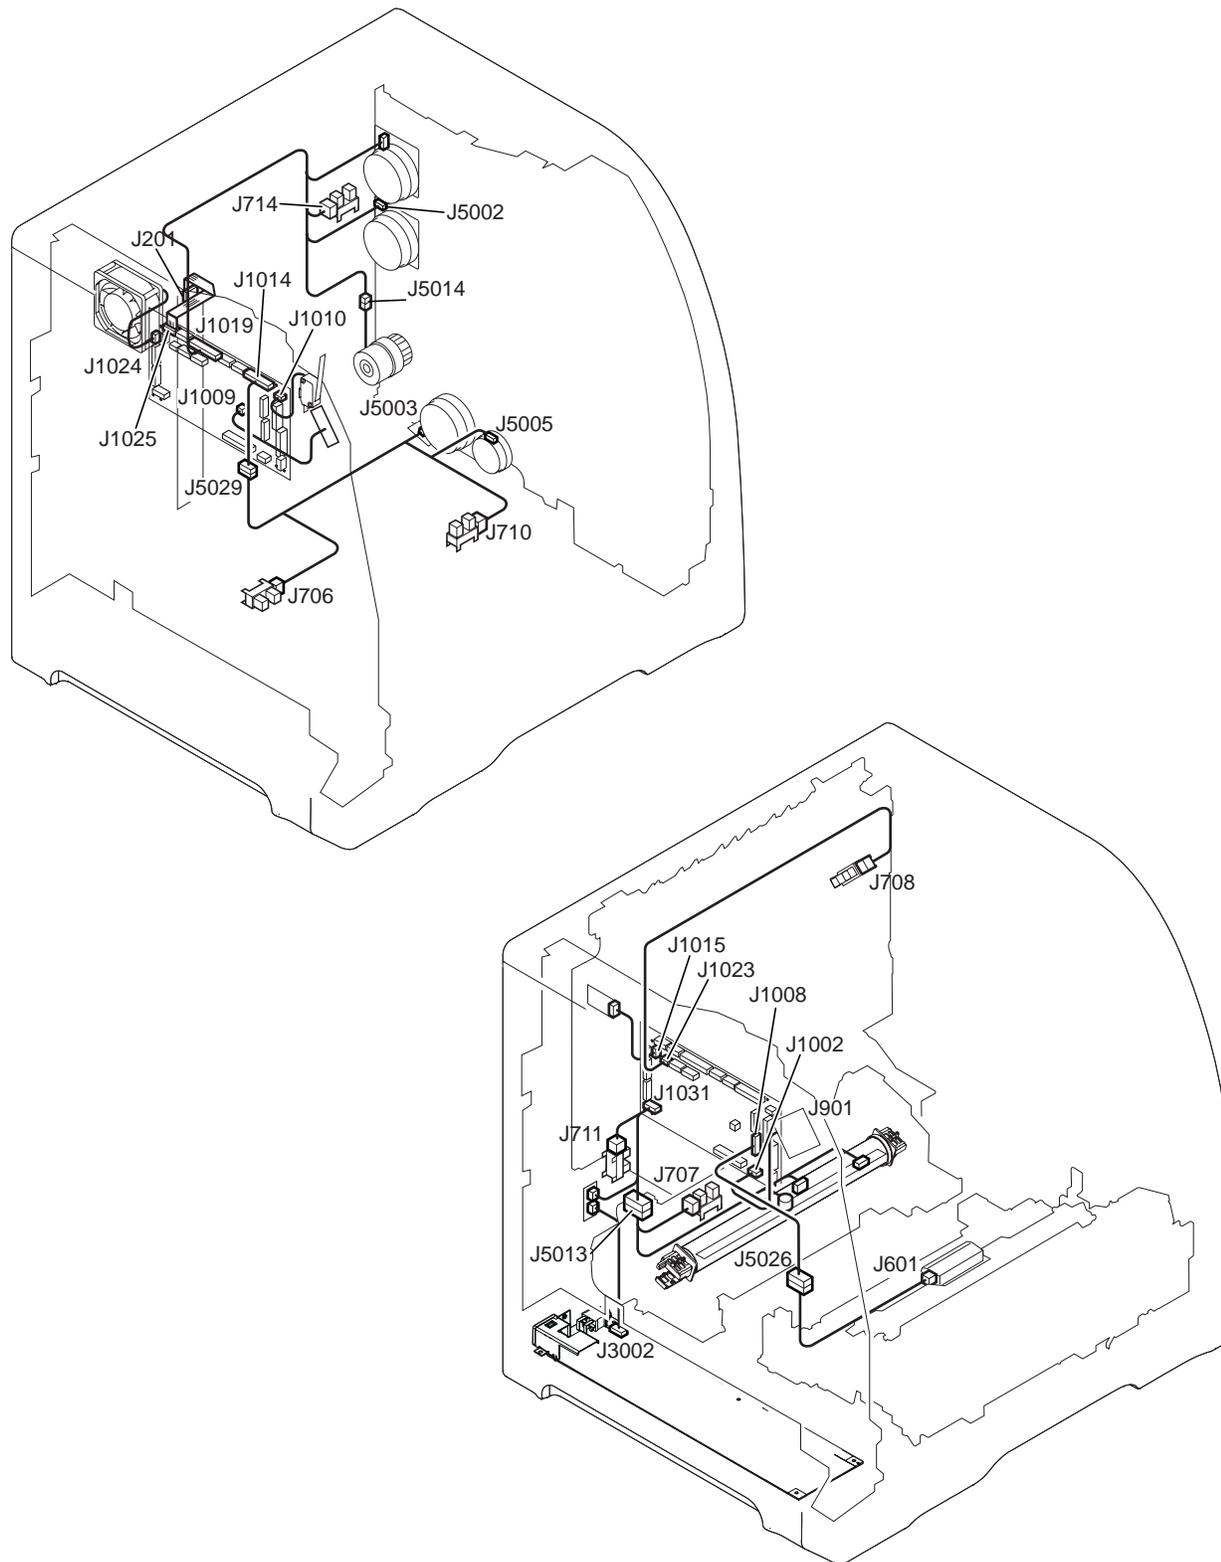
Location of DC controller PCB connectors (HP 3500/3550)
